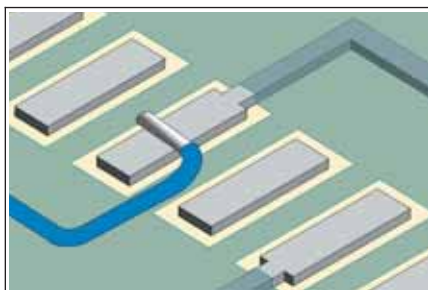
Not Recommended Wire perpendicular to conductor; contact, SMT pad.
